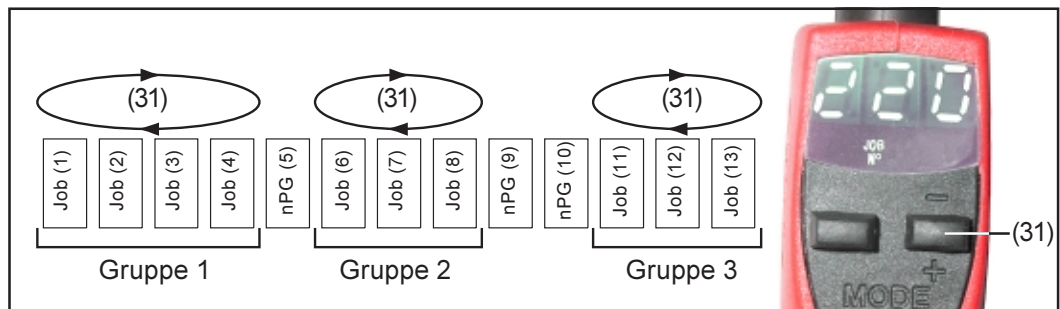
Example of job retrieval with the JobMaster TIG welding torch
